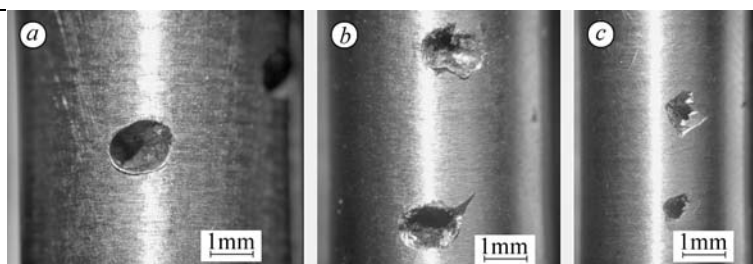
Defects in welded joints of 17G1CY steel made with wet electrodes: УОНІИ 13/55Р (a), FOX EV 50 (Böhler) (b) and Basic One (Lincoln) (c).
